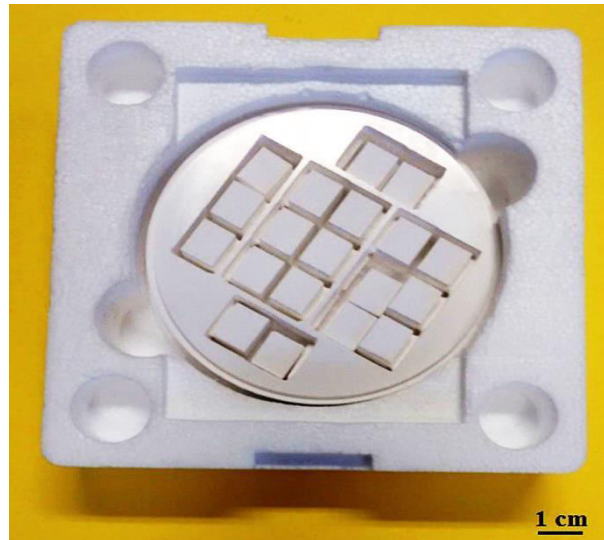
The optical image of the CAD/CAM-milled pre-sintered Y-TZP disc.
